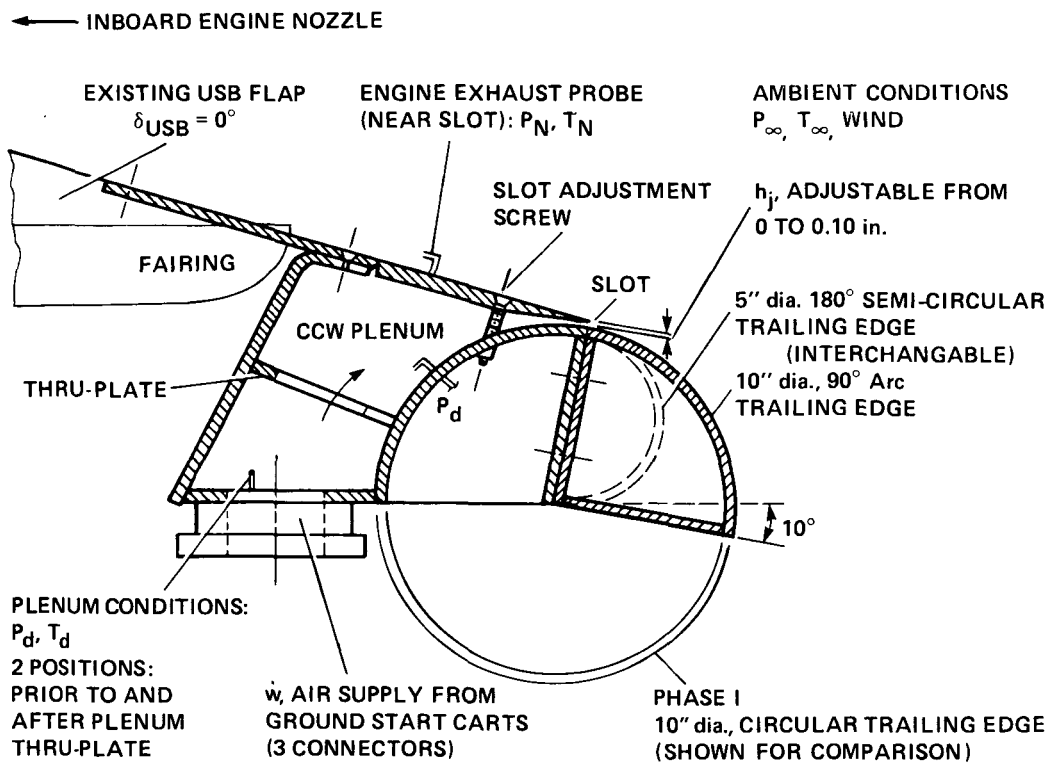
CCW/USB Phase II trailing edge assembly, installation, and test parameters.
